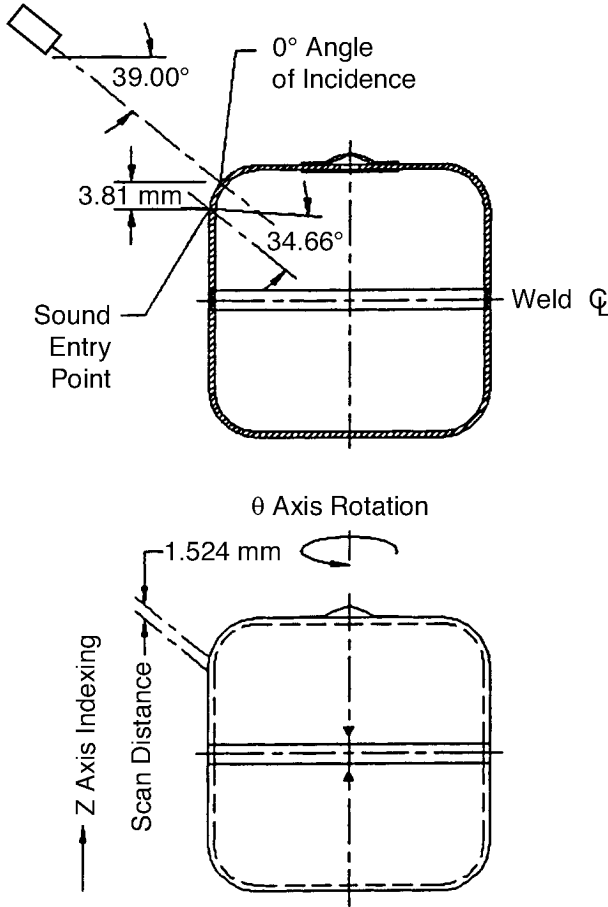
39° Lamb wave technique for Cassini ultrasonic inspection development.
